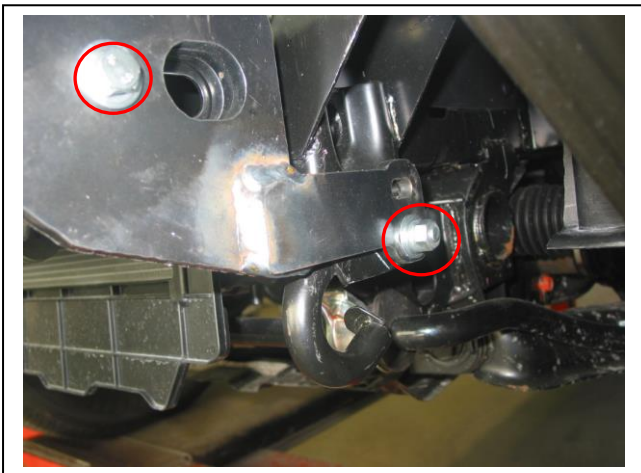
Bolt pattern on passenger side mount with bumper removed for photo.
